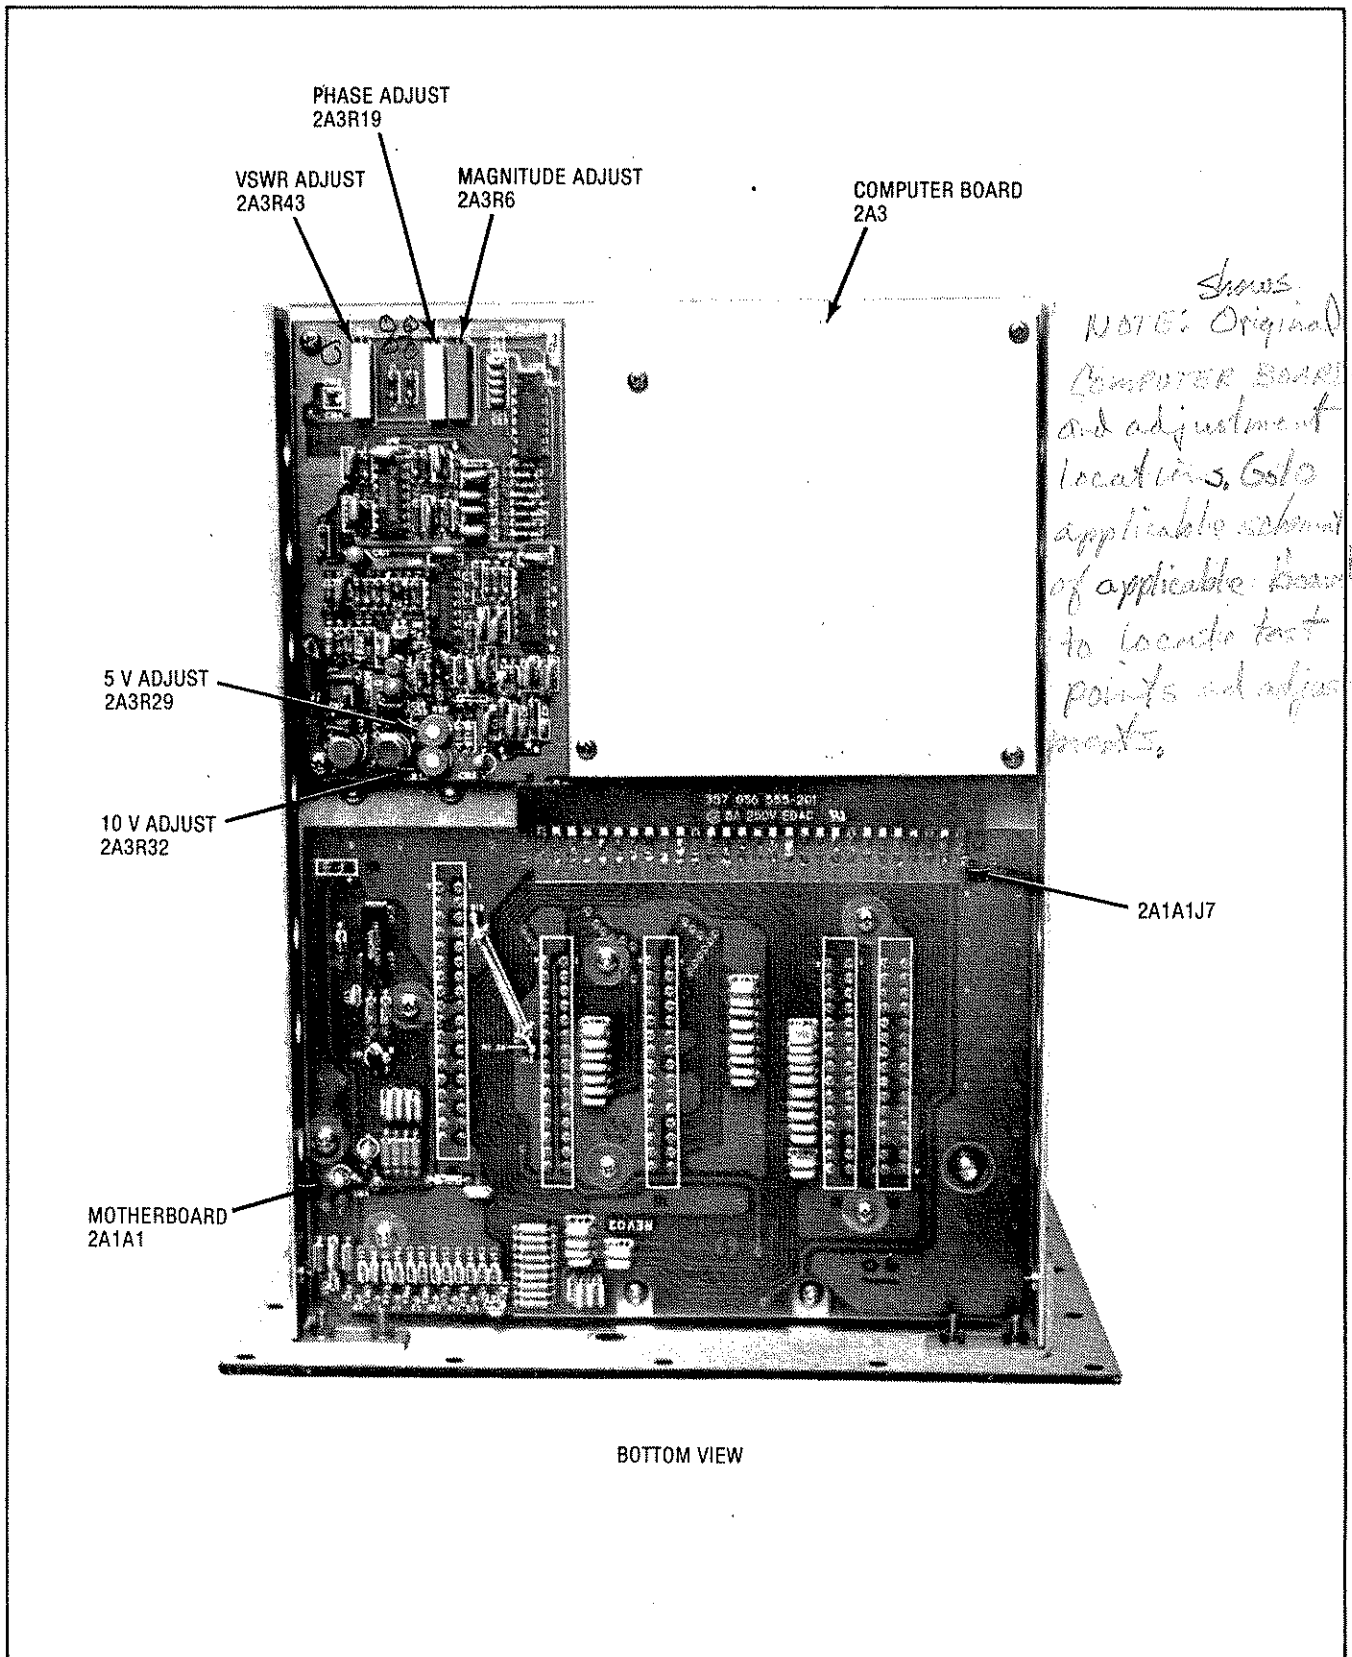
Major Assembly and Component Locations (Sheet 3 of 5)
